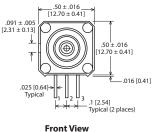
SHA21: Concentric Shafts, Solder Hooks, 2 Potentiometer(s) or RS + PP, 3/8" Bushing
